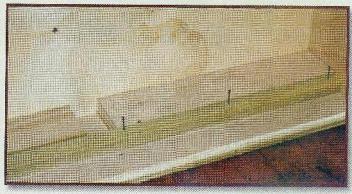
A gauge block is used to line up the rails parallel with the bottom. Note that I used two short pieces rather than one long one because they are easier to remove when finished. You might want to pre-drill the holes in the poplar with a 1/16" drill bit; the small nails used bend easily.
